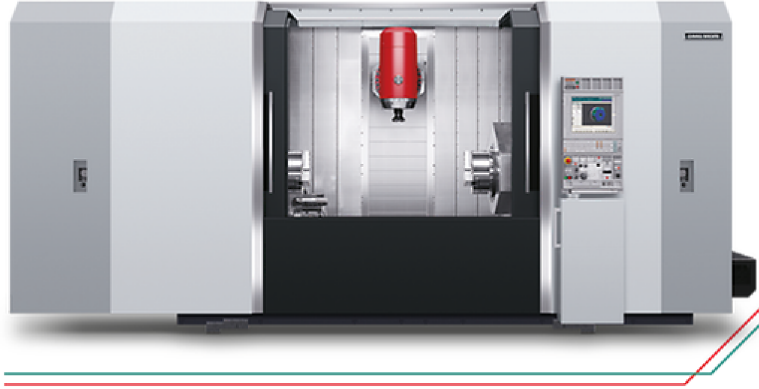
DMG MORI NT5400 DCG mill-turn machine (from [112]).
